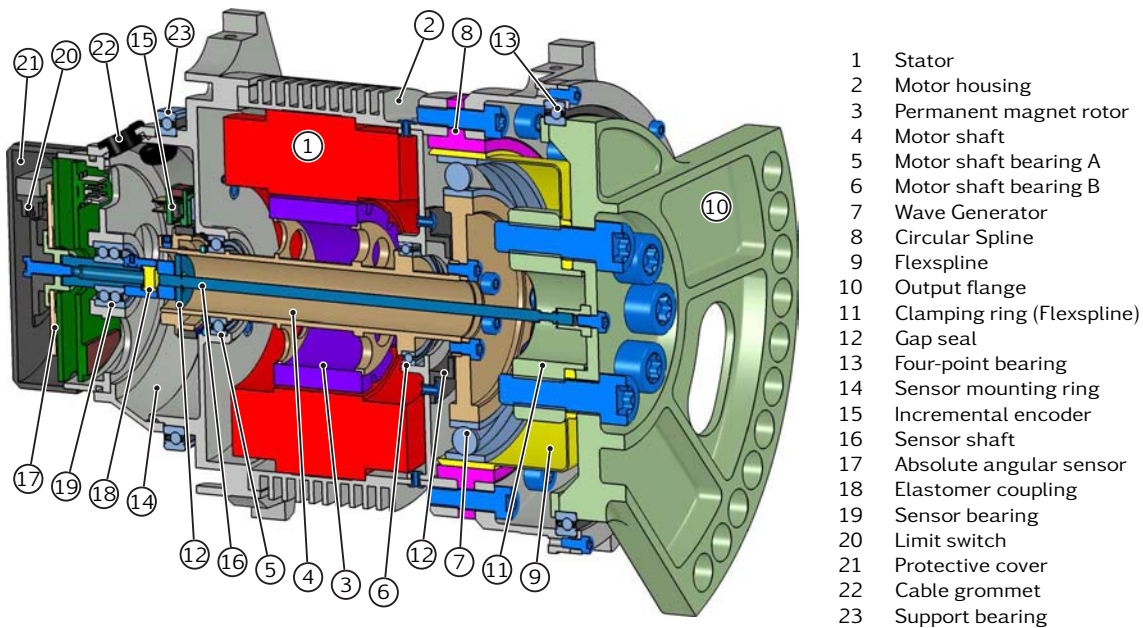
Modular design of revolute joints based on Harmonic Drive component sets (drawn to scale)
